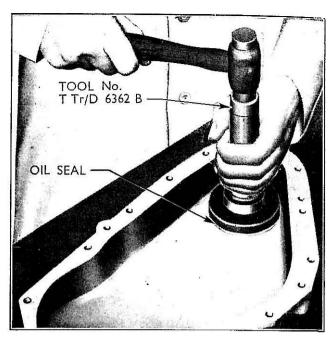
Fitting Crankshaft Oil Seal in Timing Cover
